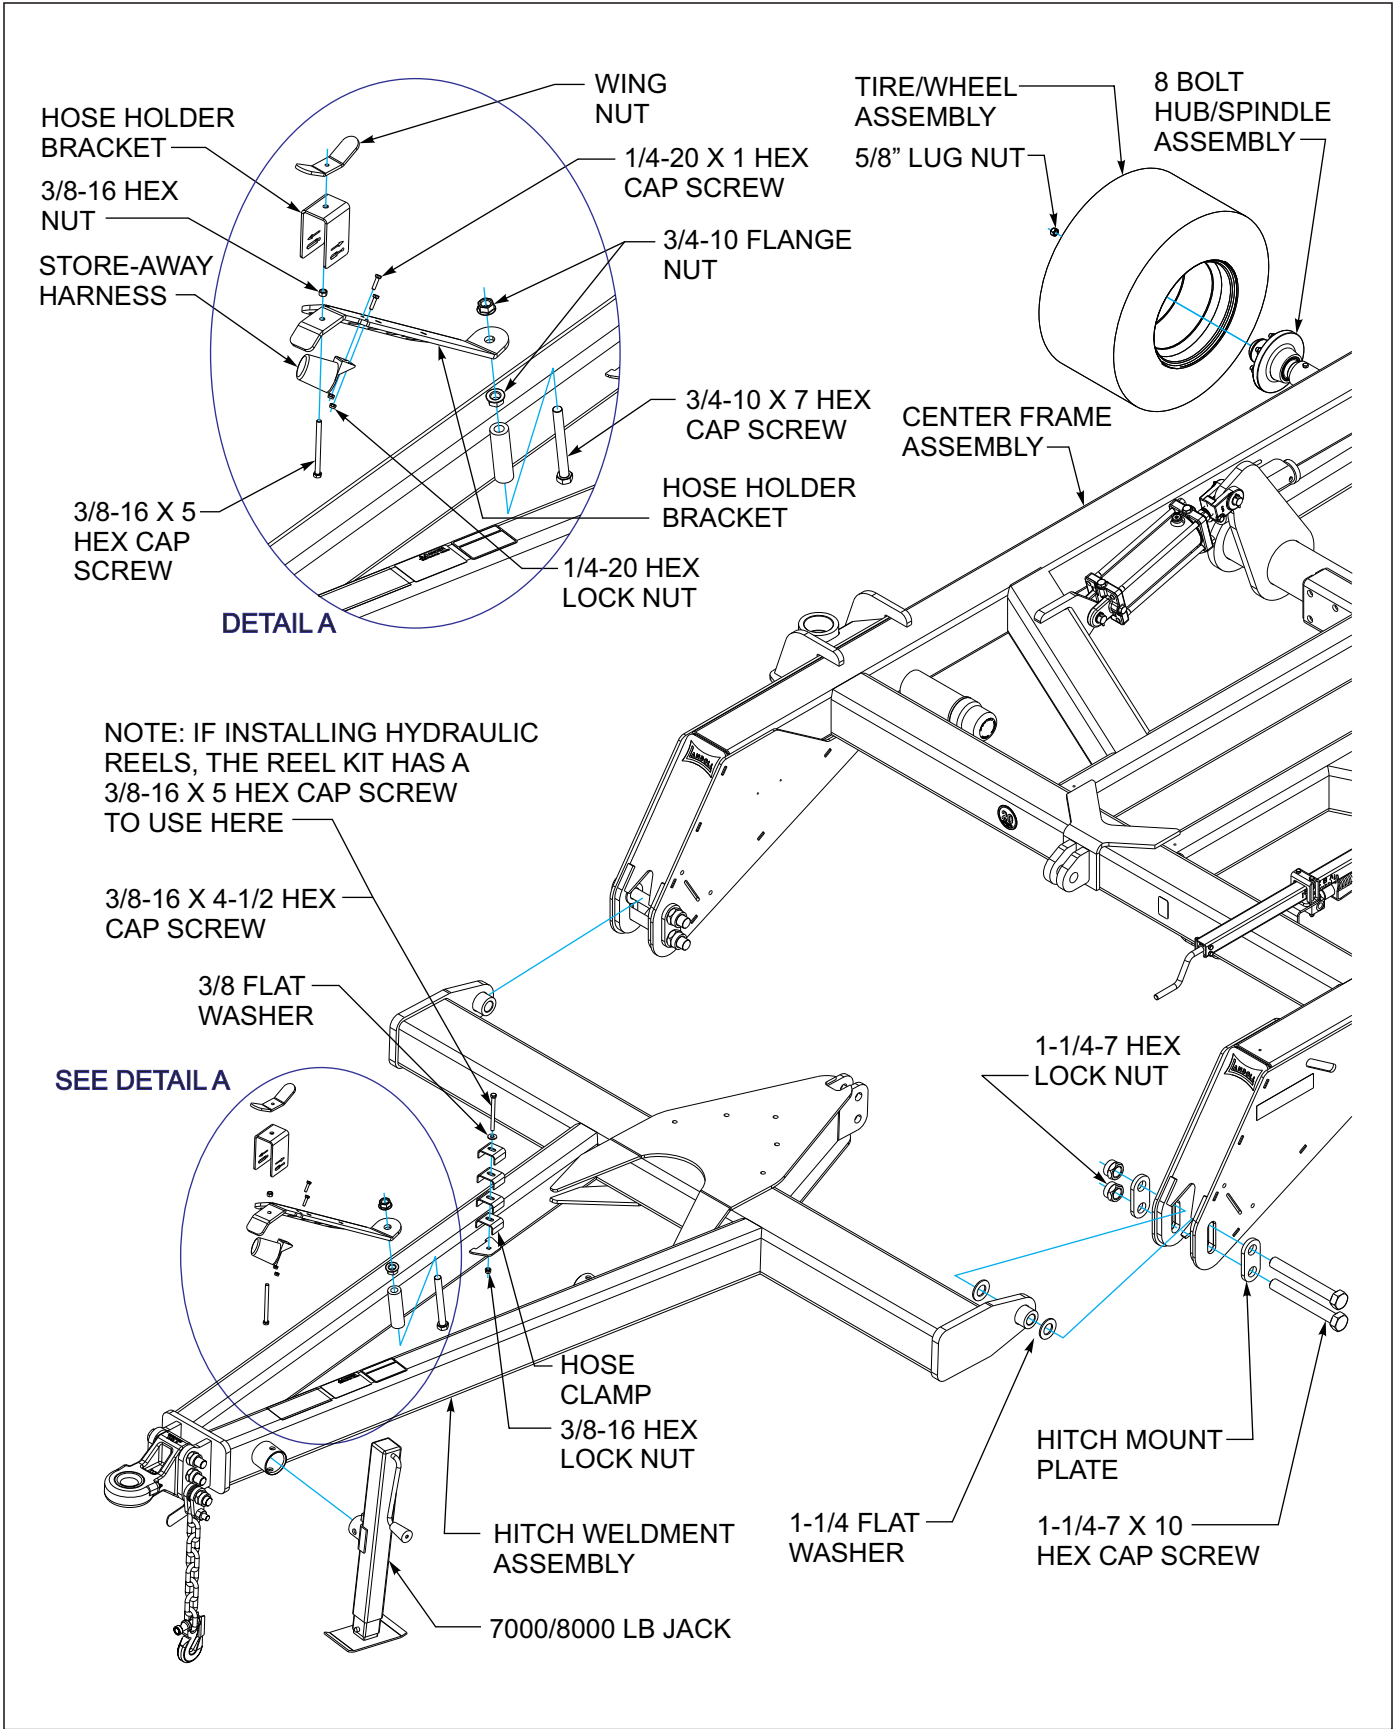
7510-14' Frame and Hitch Assembly Installation
